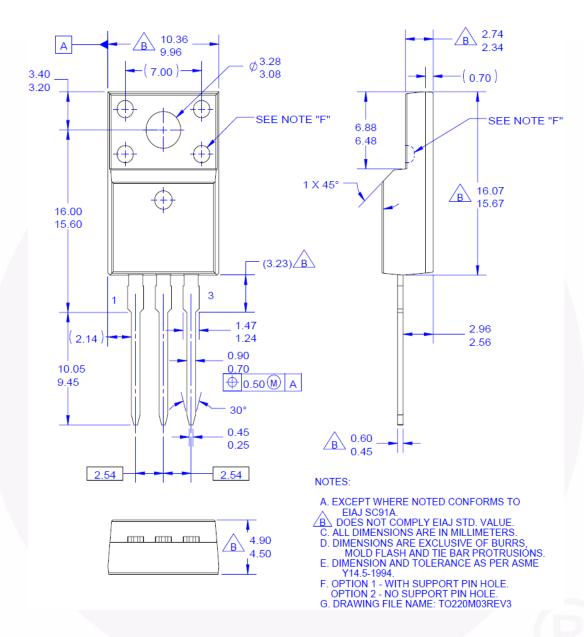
TO-220F 3L - TO220, MOLDED, 3LD, FULL PACK, EIAJ SC91, STRAIGHT LEAD
